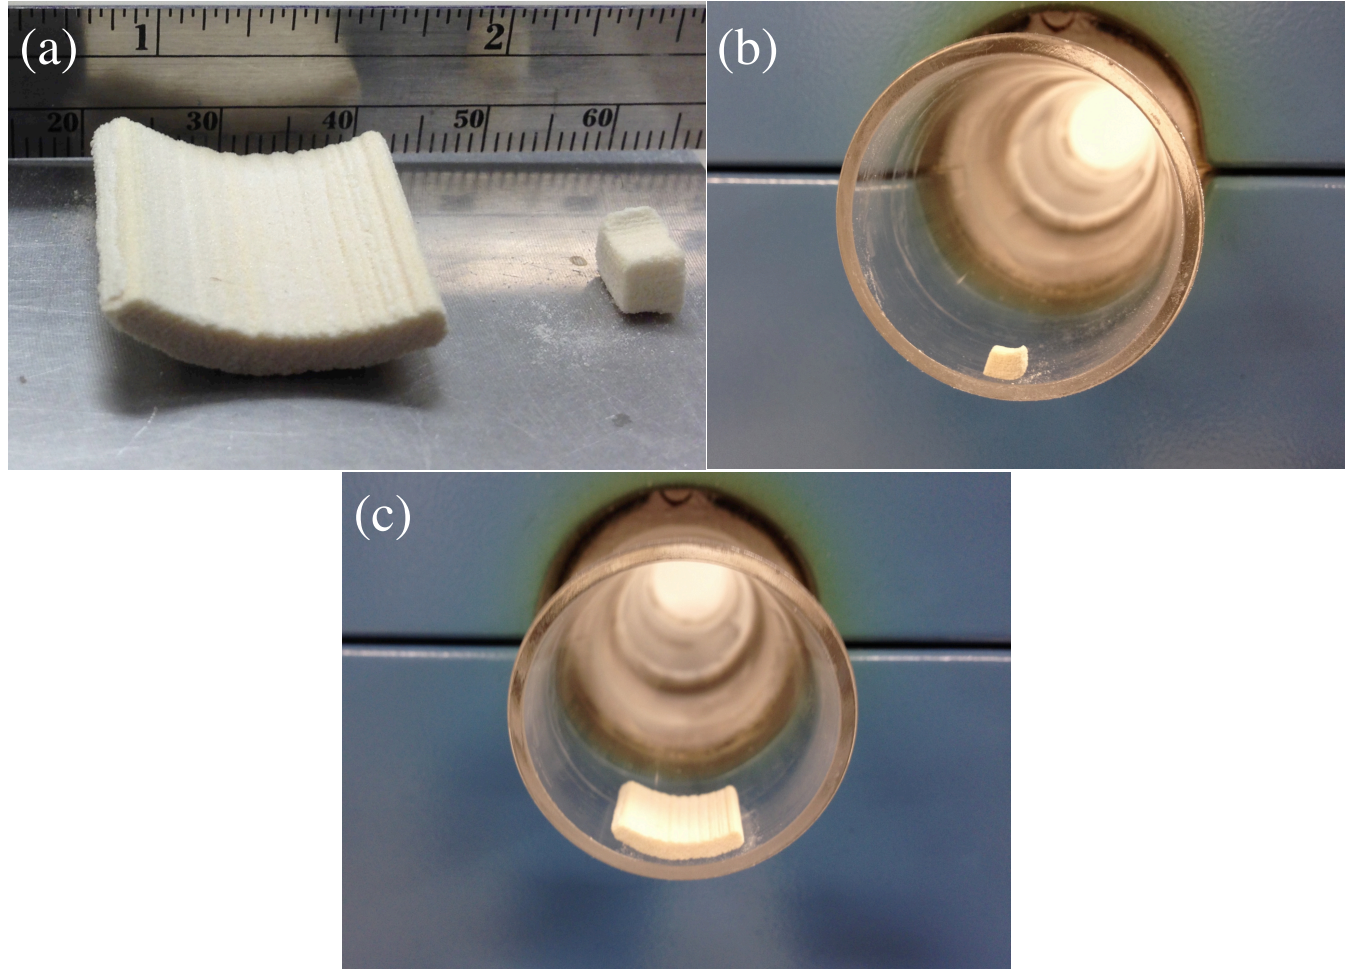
Fabricated curved samples (a) as built samples (b) small sample fitted inside the tube (c) large sample inside the tube
